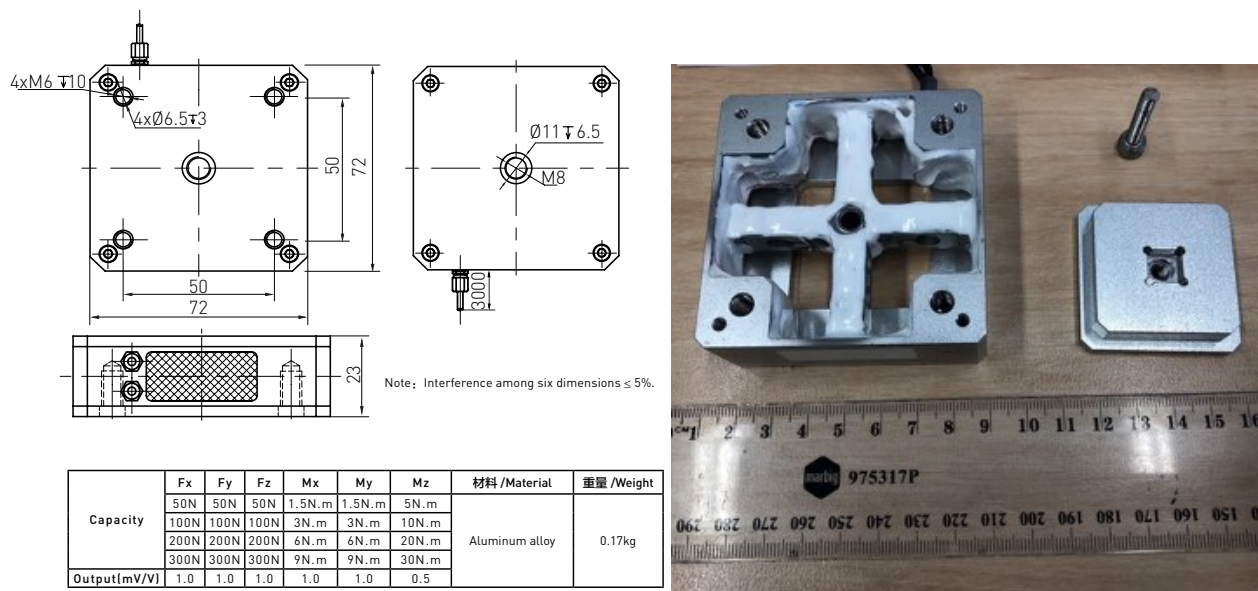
(a) Geometry and capacity of the commercial Tectsis F9866 six-component load cell. (b) disassembled load cell showing instrumented cruciform and attachment plate.
